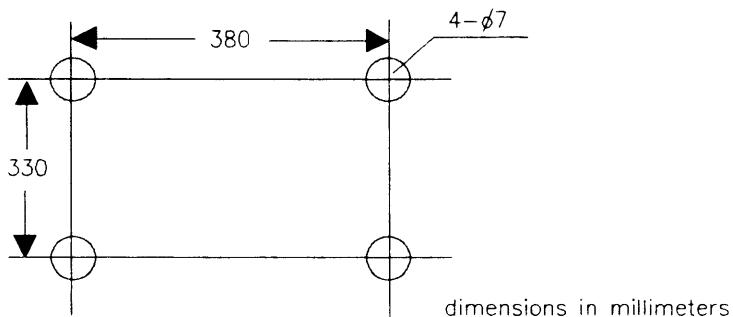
Mounting Dimensions of the Antenna Coupler
